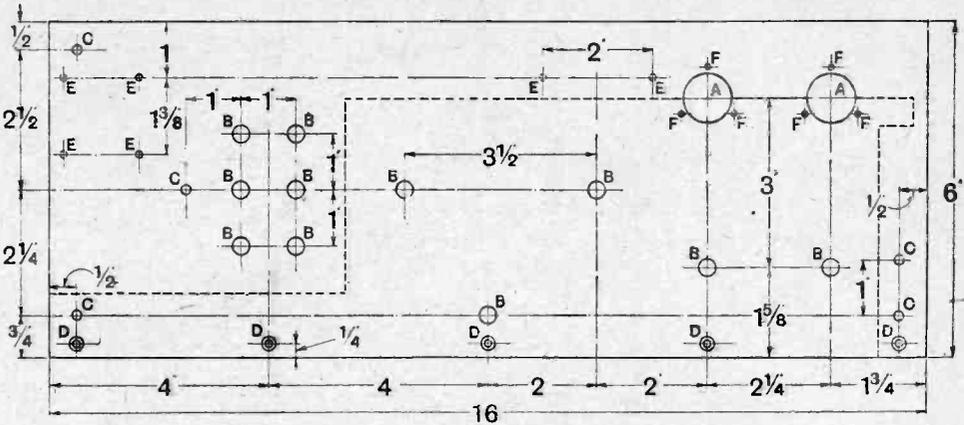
Drilling dimensions for the front panel. The sizes of holes are as follows: A, 7/8in. dia.; B, 5/16in. dia.; C, 5/32in. dia.; D, 1/8in. dia. and countersunk for No. 4 wood screws; E, 4B.A. tapping (0.116in. dia.); F, 3/32in. dia.
